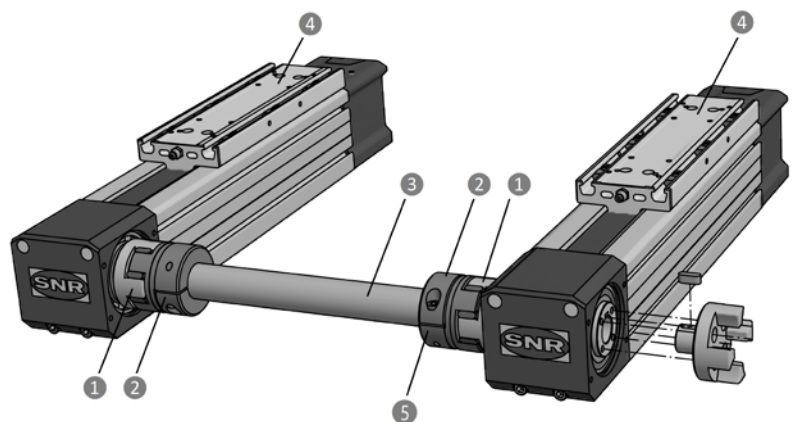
Mounting of parallel Linear Axis with connecting shaft
